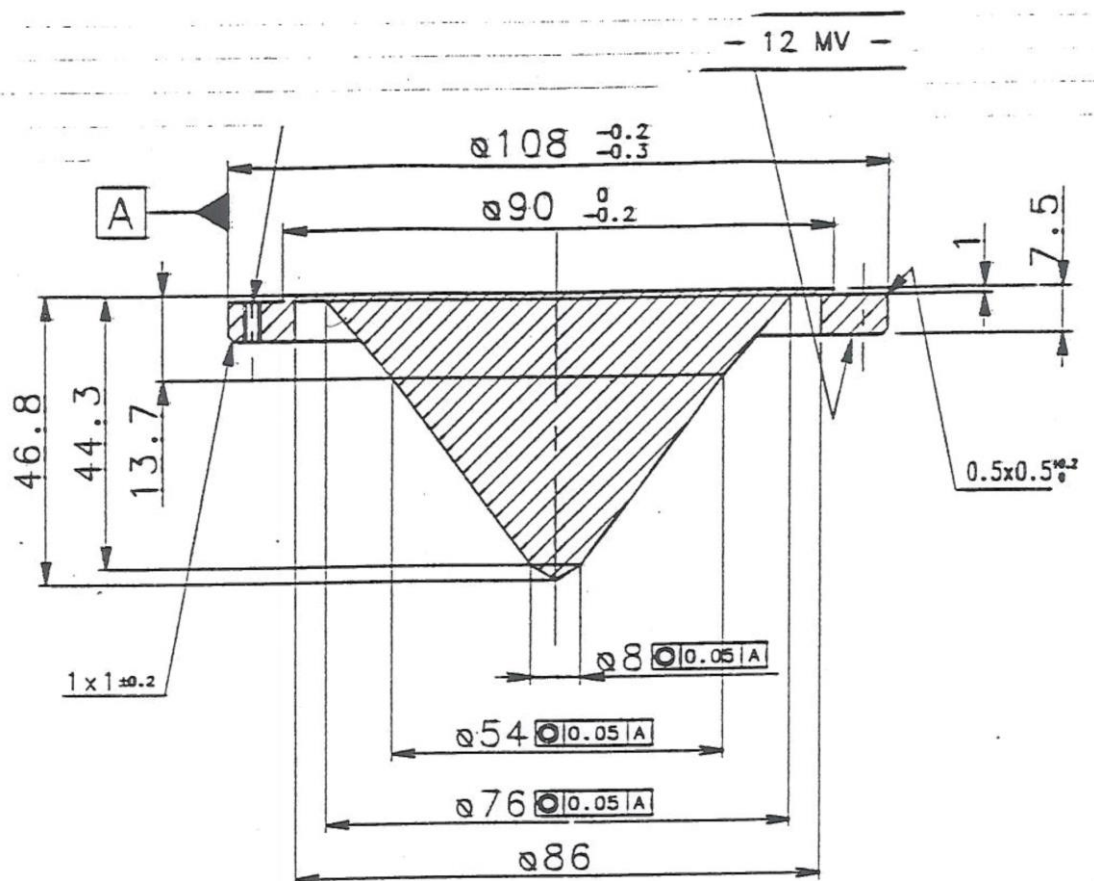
Construction drawing of the flattening filter (all dimensions in mm).
